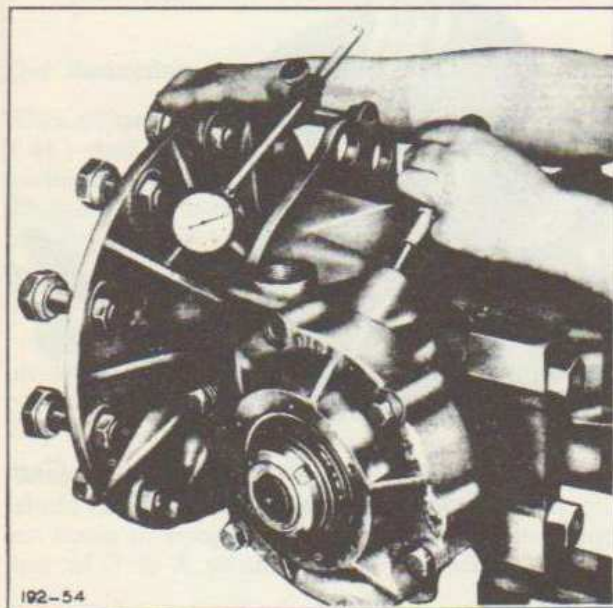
Checking Backlash of 3rd Reduction Gear Set with Dial Indicator
